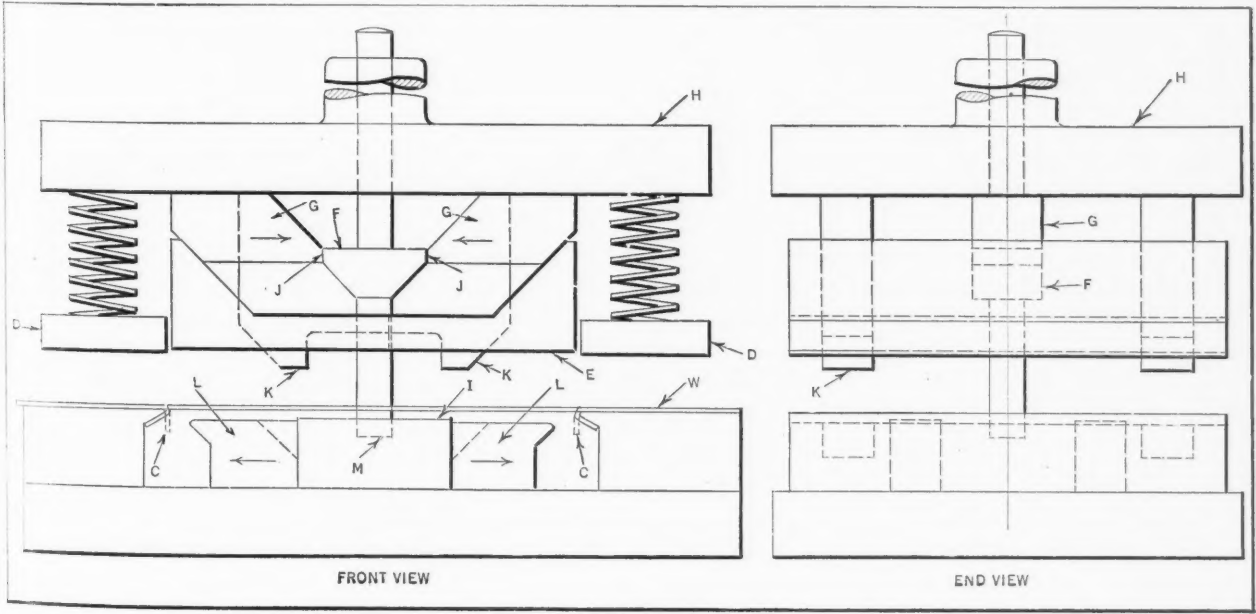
Die Used for Bending Inner Edges of Part Shown in Fig. 1
